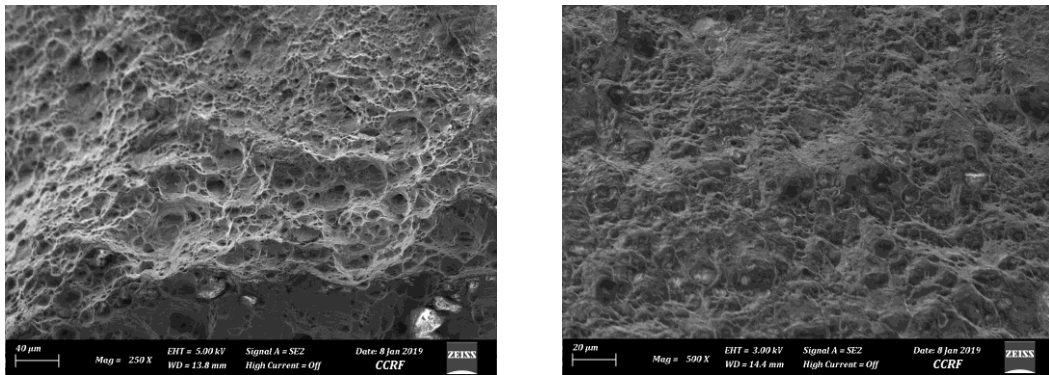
shows fractured surface morphologies of three failure modes on interface, interface + NZ and TMAZ, which explained in chapter 3.2.1. It is seen in Fig. 3-17(a) that fractured surface on interface failure mode exhibits cleavage fracture in aluminium side, which is remarkably influenced by intermetallic compounds. This failure mode is mainly observed at lower travel speed of 60 mm/min. When travel speed is mainly 120 mm/min, the mixed mode indicating dimples and cleavages are observed in fractured surface on interface + NZ failure mode, as shown in Fig. 3-17(b).
